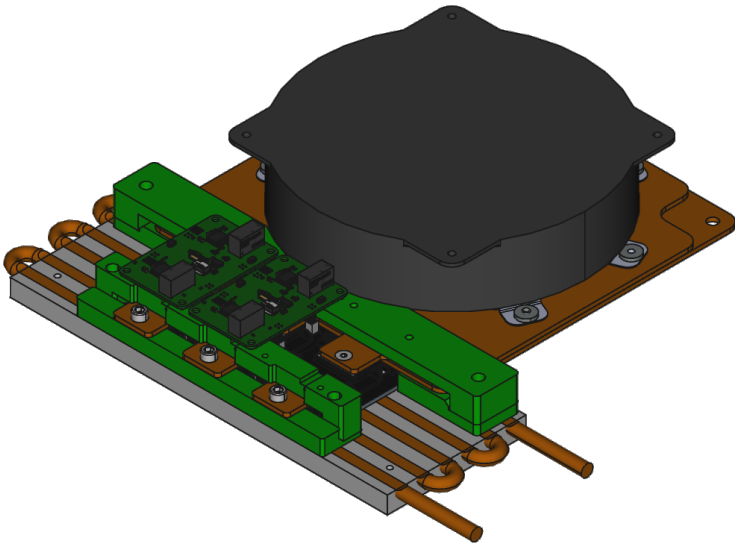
3D Printed Support Brackets with Two Gate Drivers Mounted.
